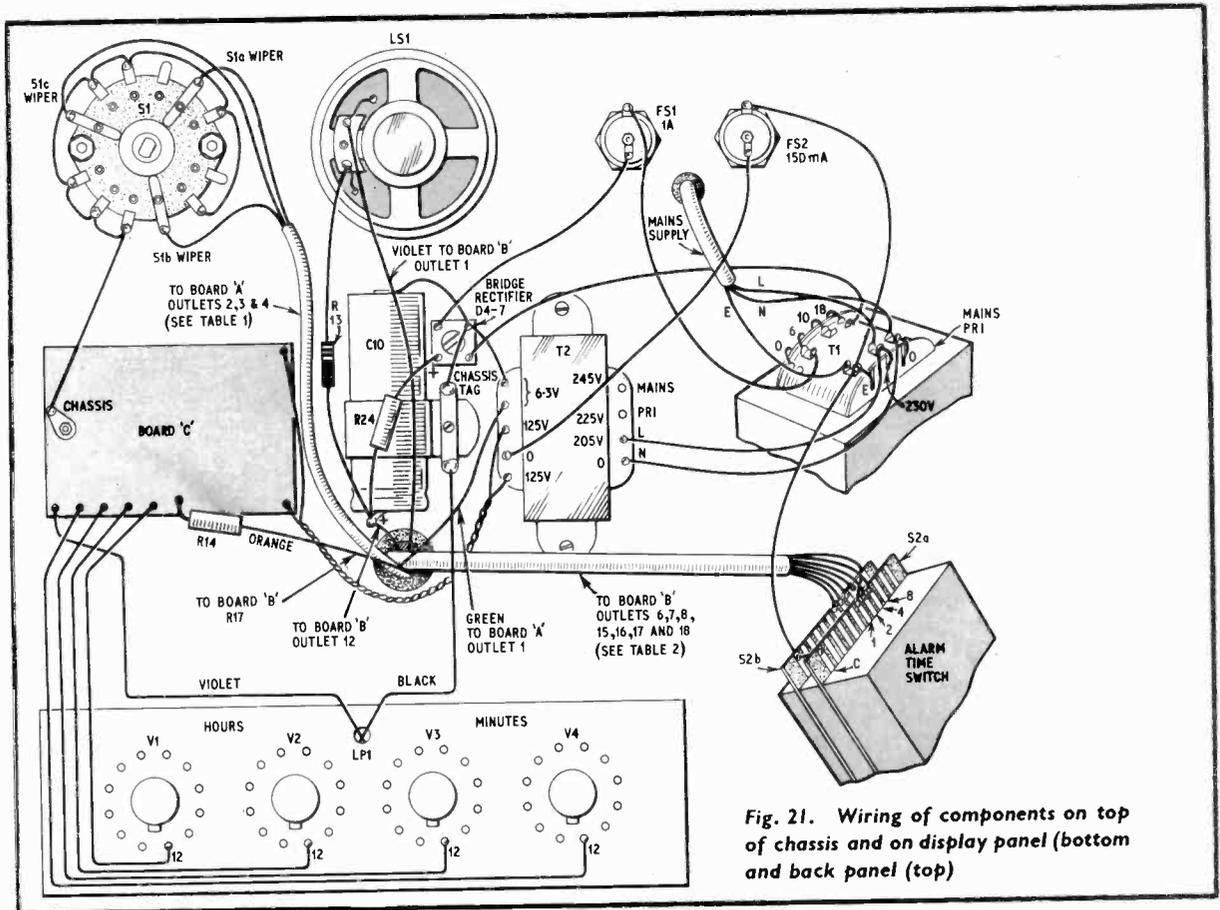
Wiring of components on top of chassis and on display panel (bottom and back panel (top))
